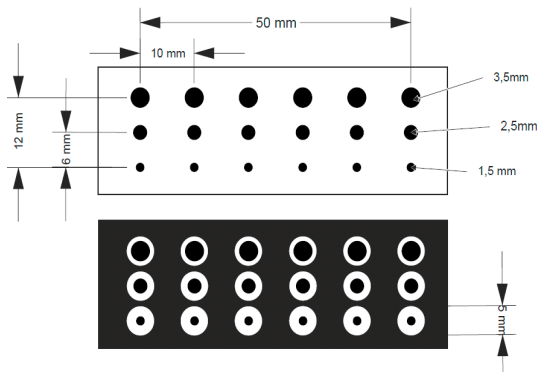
Sensor array with 18 sensors. Different sensors layouts have been realized by using laser ablation, wet etching and mechanical milling. Laser ablation and milling provide the best sensor performance, whereas the wet etching is not really suitable due to the low selectivity. Black areas are the Ag-electrodes remaining.
